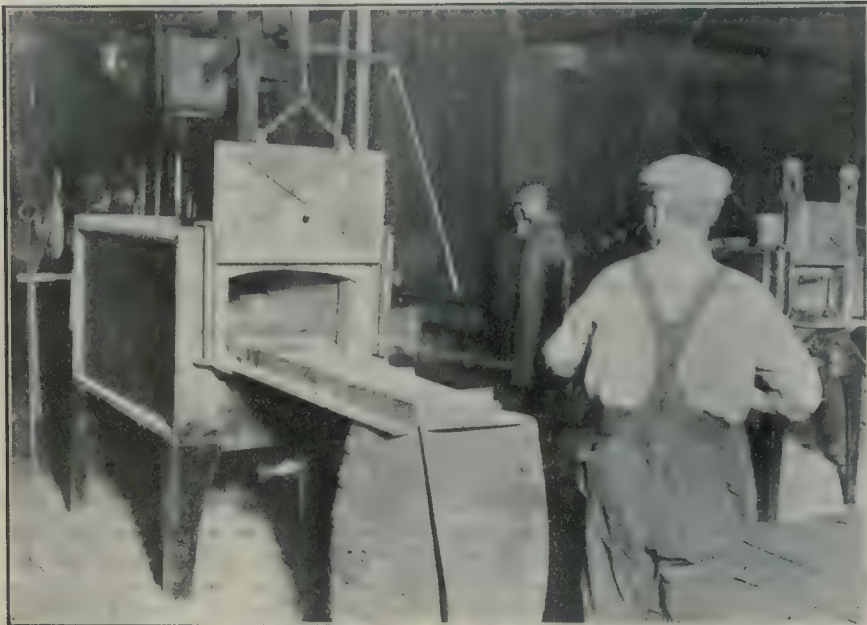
FIG. E—BELLEVUE ANNEALING FURNACES FOR HEAT TREATING STEEL SHELL FORGINGS IMMEDIATELY THEY LEAVE THE WOOD PRESSES.
